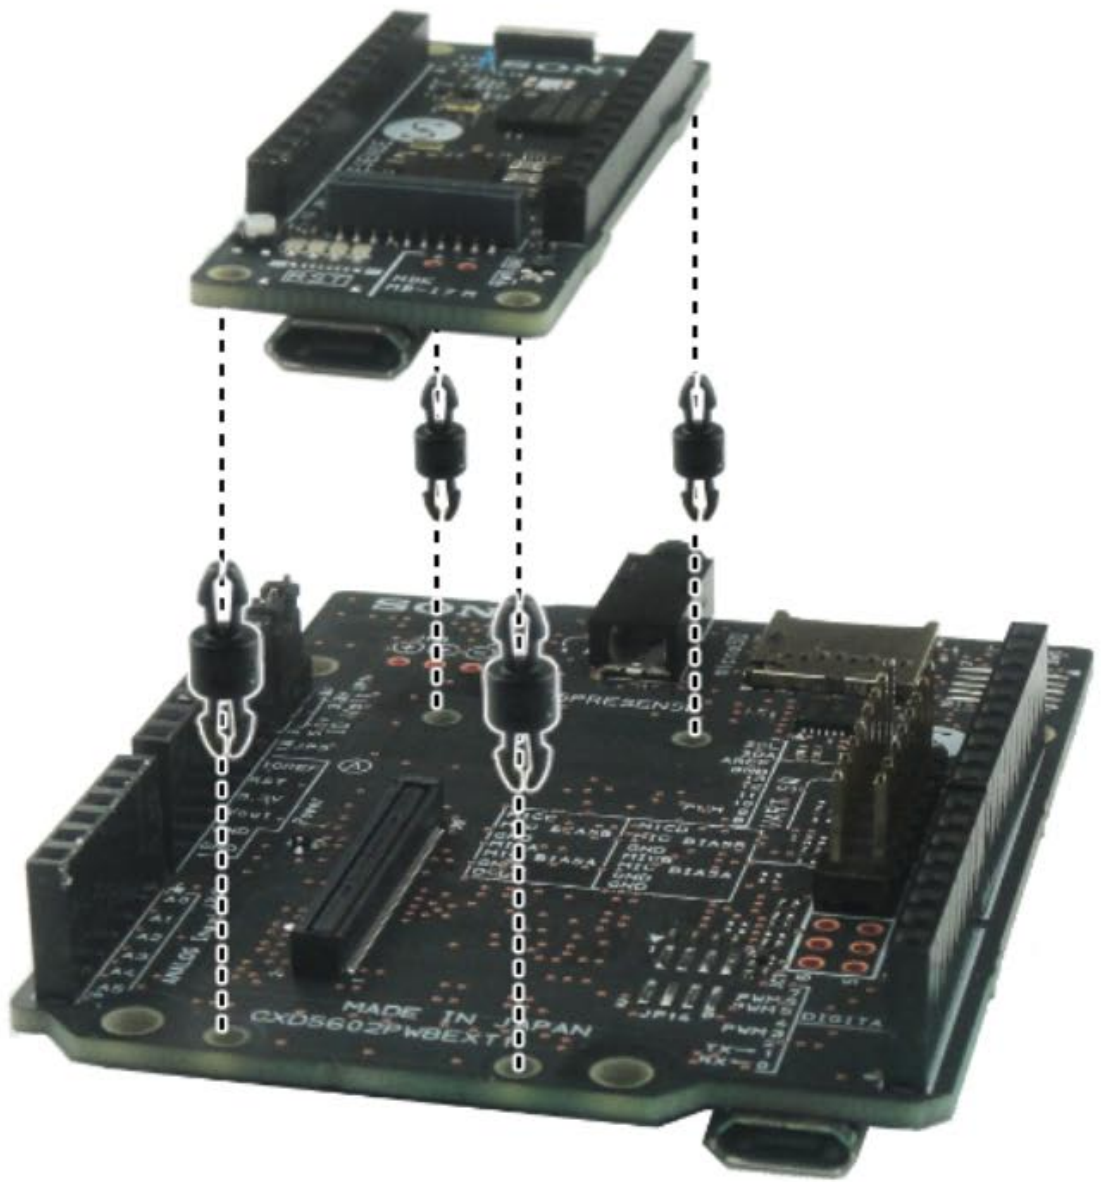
Exploded view of the Spresense extension board, spacers and the Spresense main board.
